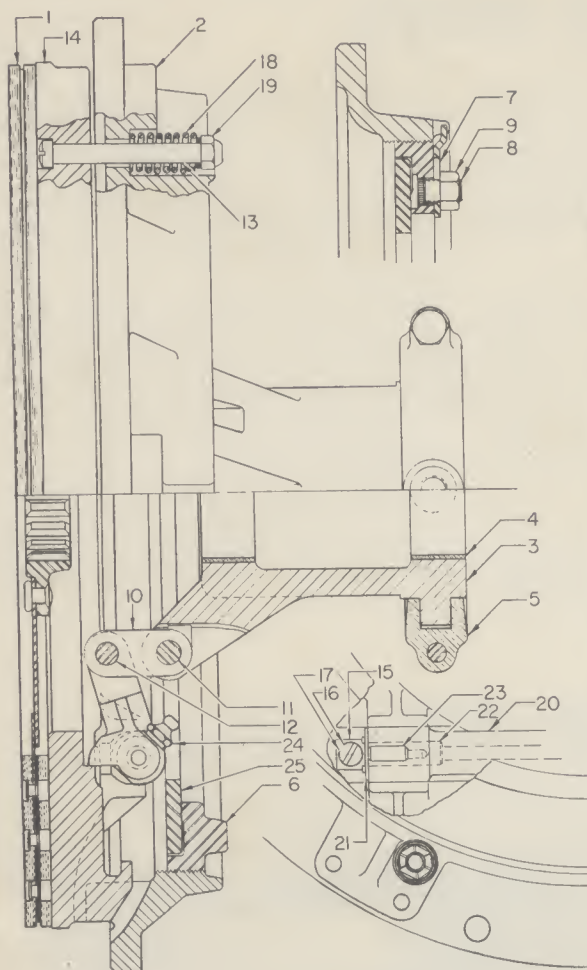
Over-center type clutch as used optionally on Super 99 GM Diesel tractors.
